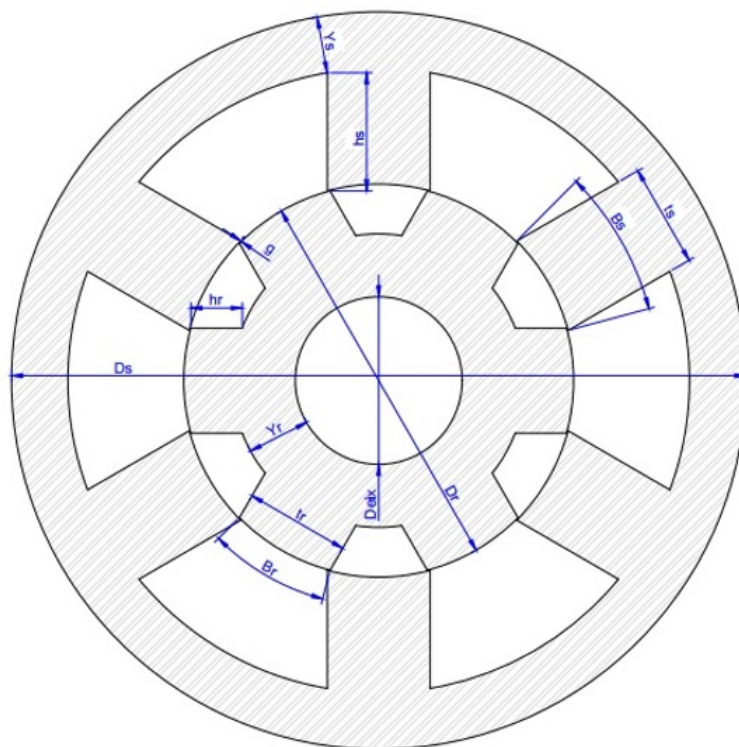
Dimensions of the Single-Phase Variable Reluctance Motor.
